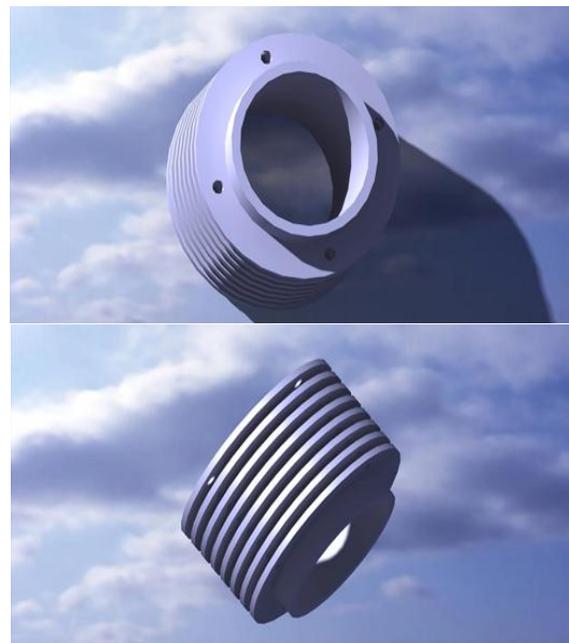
geometrical modal of modified cylinder barrel in CATIA V5
